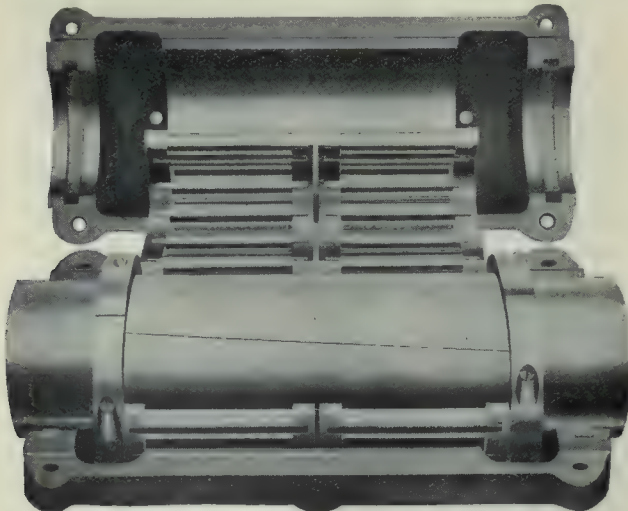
Sells Roller Bearing of Double Cage Type.
